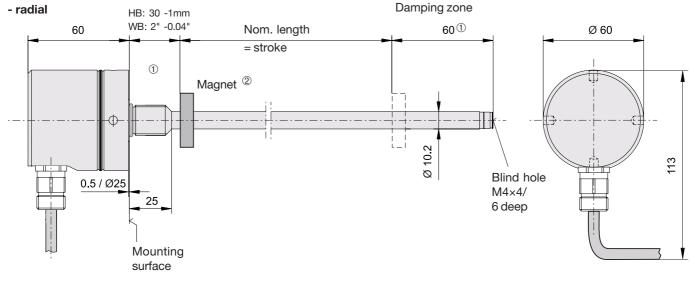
Transducer BTL5-...HB/WB-..., Dimensions
